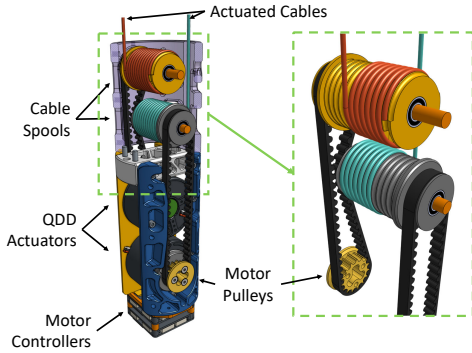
Cutaway view of the drive unit CAD model. The red and teal strings are the actuated cables. The right side of the image shows a close up of the belt driven, dead-axle, grooved cable spool design. The motor controllers are located at the base of the unit.
